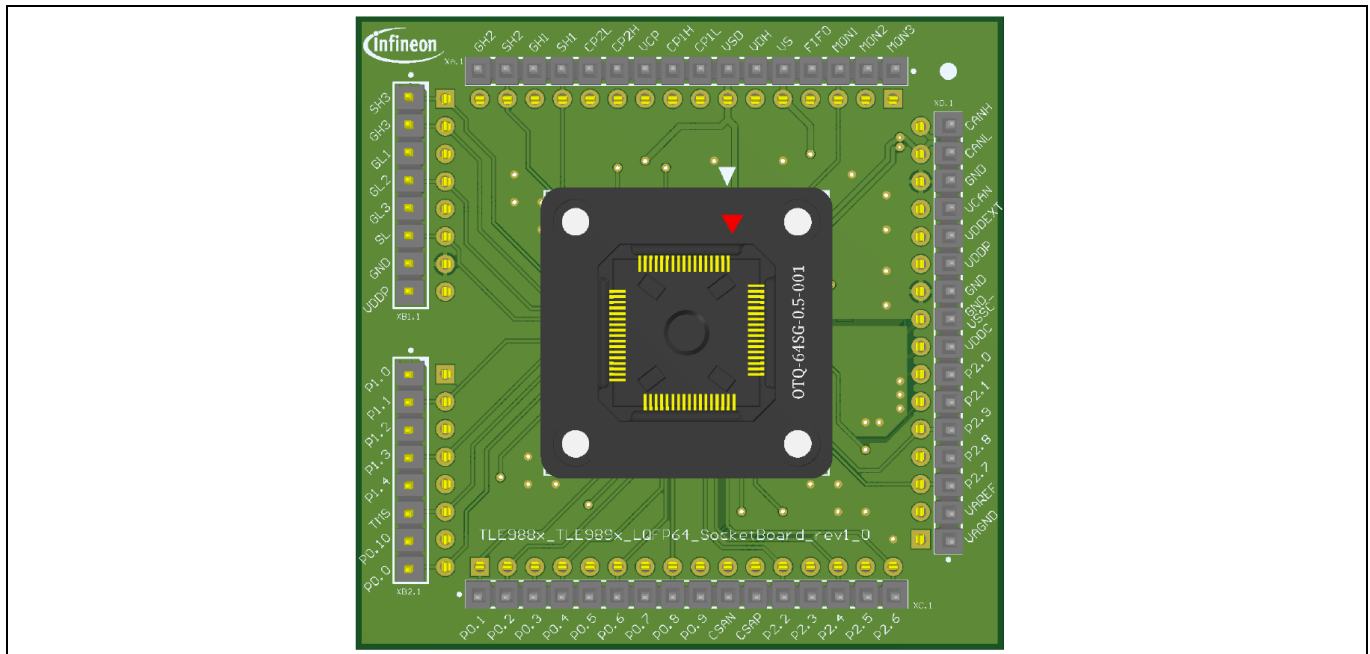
TLE988x_TLE989x LQFP64 Socketboard (top view)
